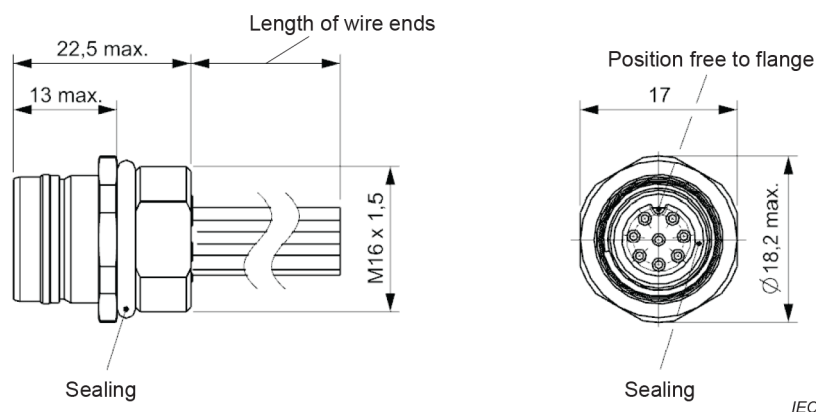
Fixed connector, female contacts, with M12 screw locking and outer push-pull locking, with wire ends, single hole front mounting thread M16 × 1,5
